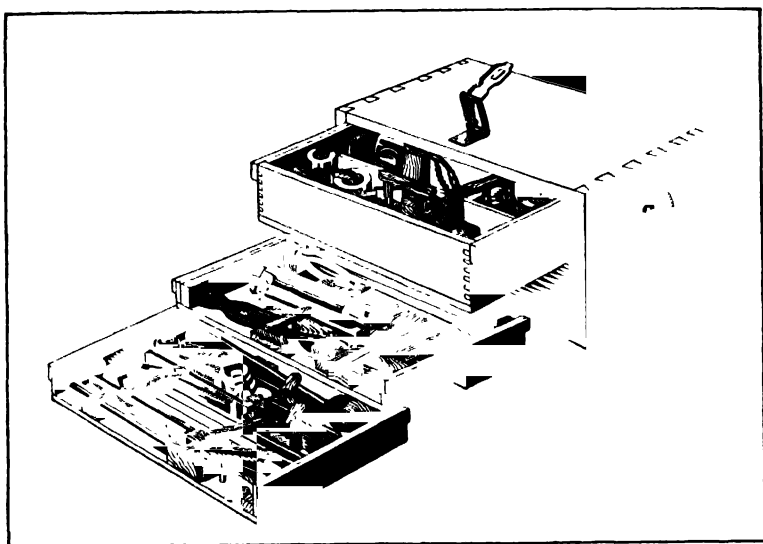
Tool Box Containing Special Tools Used in Overhaul of Siemens-Halske Engines.
